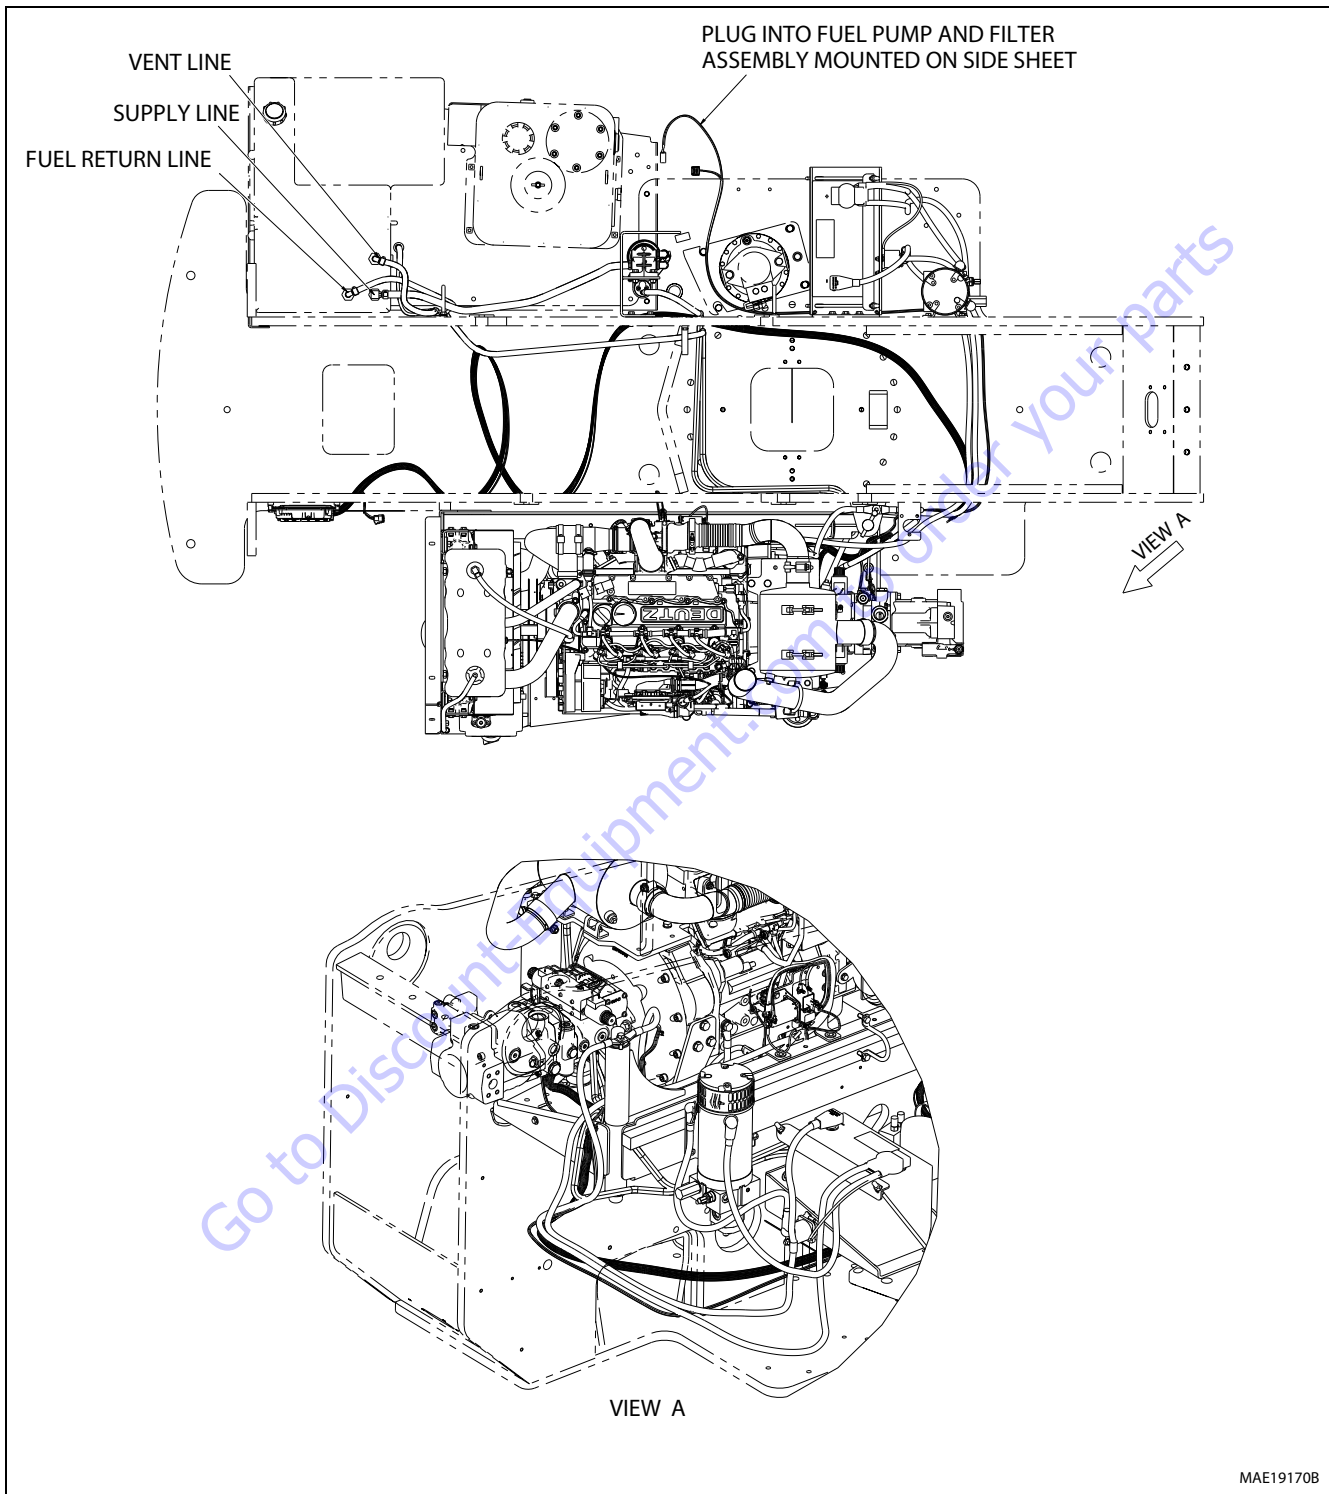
Deutz TD2.9L4 China III Engine Installation - Sheet 1 of 7
